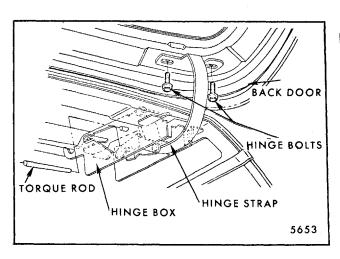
Back Door Hinge Attachment - H-15 Styles
